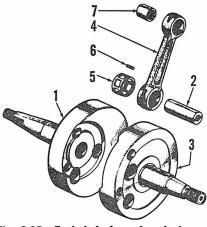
Exploded view of typical press together crankshaft assembly. Many manufacturers have preassembled complete units available as service part.
